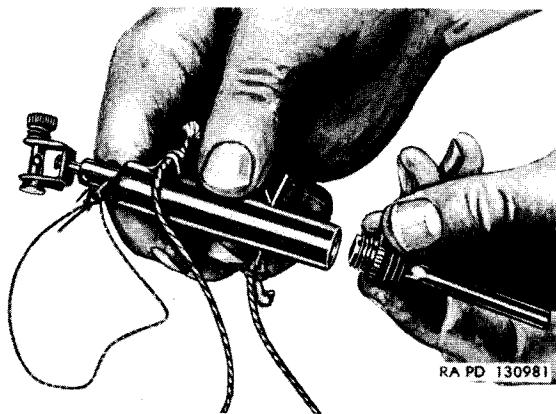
Assembling pull-release type firing mechanism to primed coupling base with crimped-on blasting cap.
